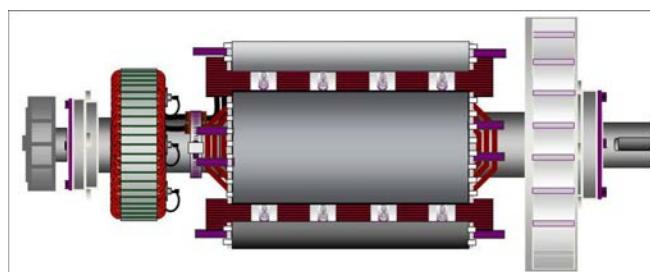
TWO BEARING ALTERNATOR ROTOR SHOWING SHAFT WITH KEYWAY FOR FLEXIBLE COUPLING AT RIGHT
